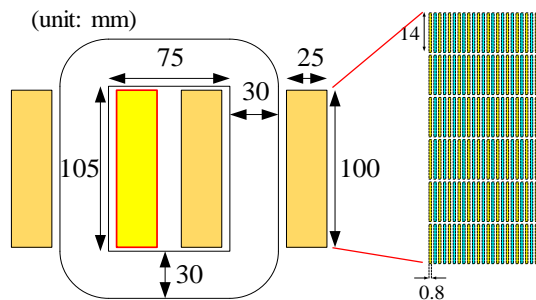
Shape and dimensions of the amorphous transformer with interleaved-winding.
